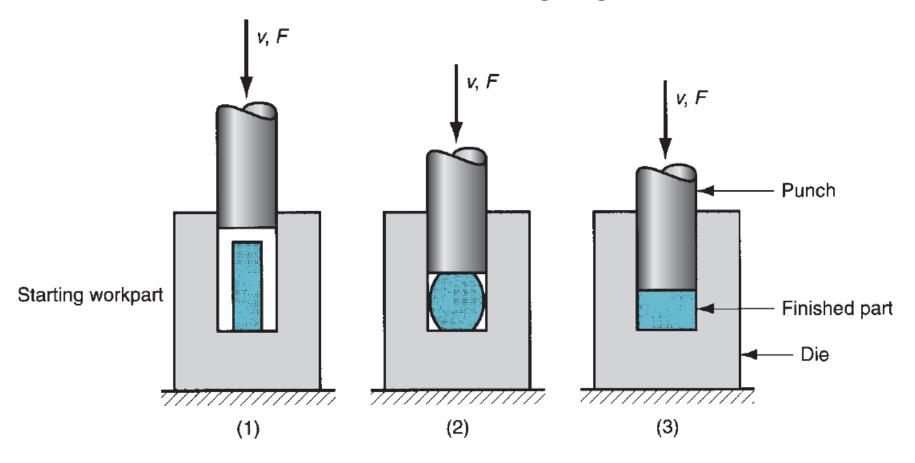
Flashless forging: (1) just before initial contact with workpiece, (2) partial compression, and (3) final punch and die closure.
